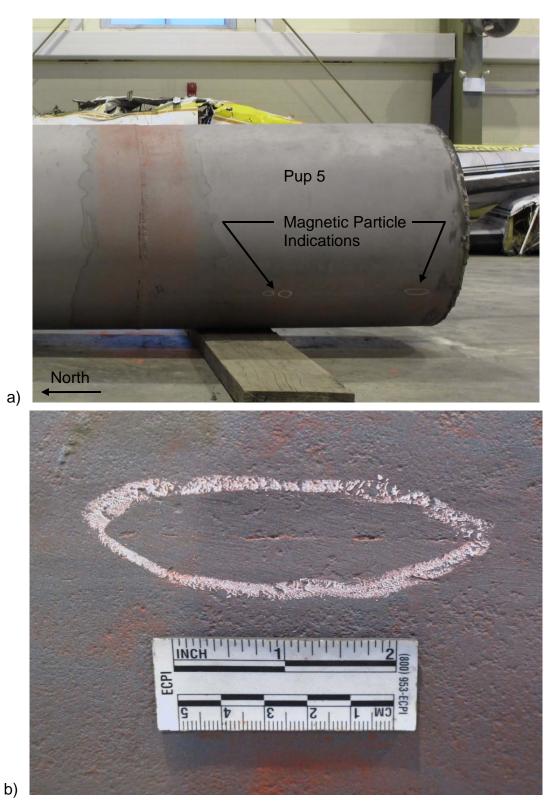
a) Pup 5 showing the location of features detected by magnetic particle inspection; b) Macrophotograph of the feature 5.5 inch north of the C5 girth weld.
